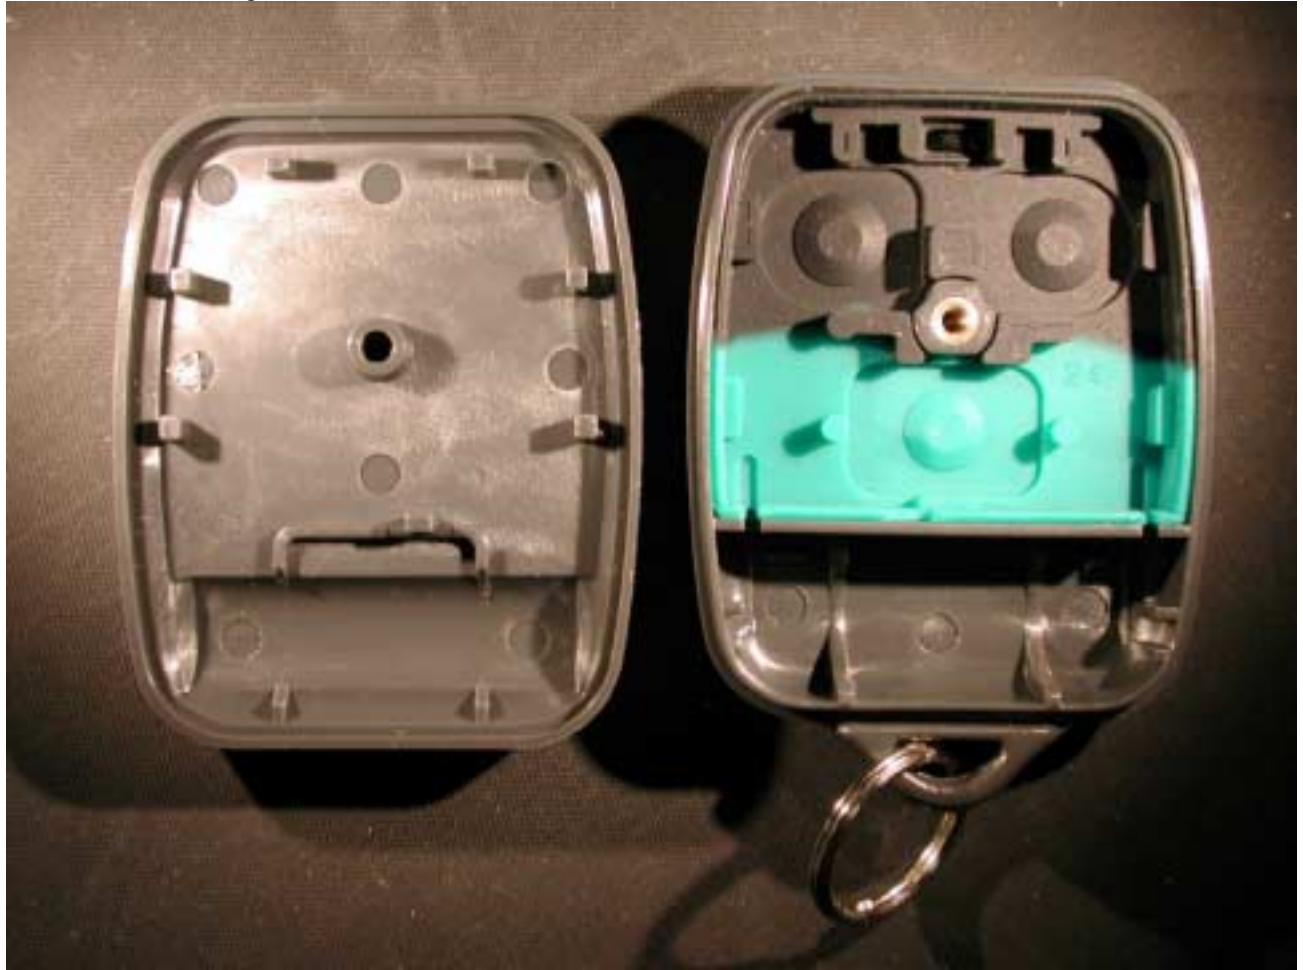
MMT500 508 Remote Transmitter Case - Inside
